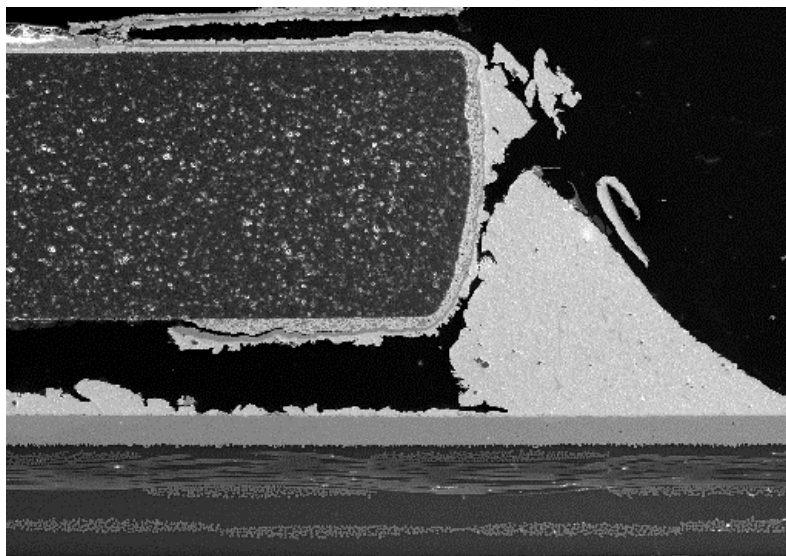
Typical X-Section of a Completely Cracked SnAgCu Solder Joint, 2512 Chip Resistor after 1250 Cycles
